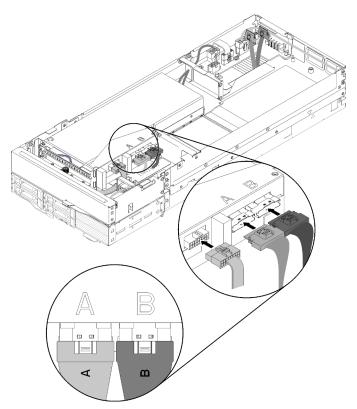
Connecting PCIe#3-A, PCIe#4-B and the riser miscellaneous cable to the front riser assembly
